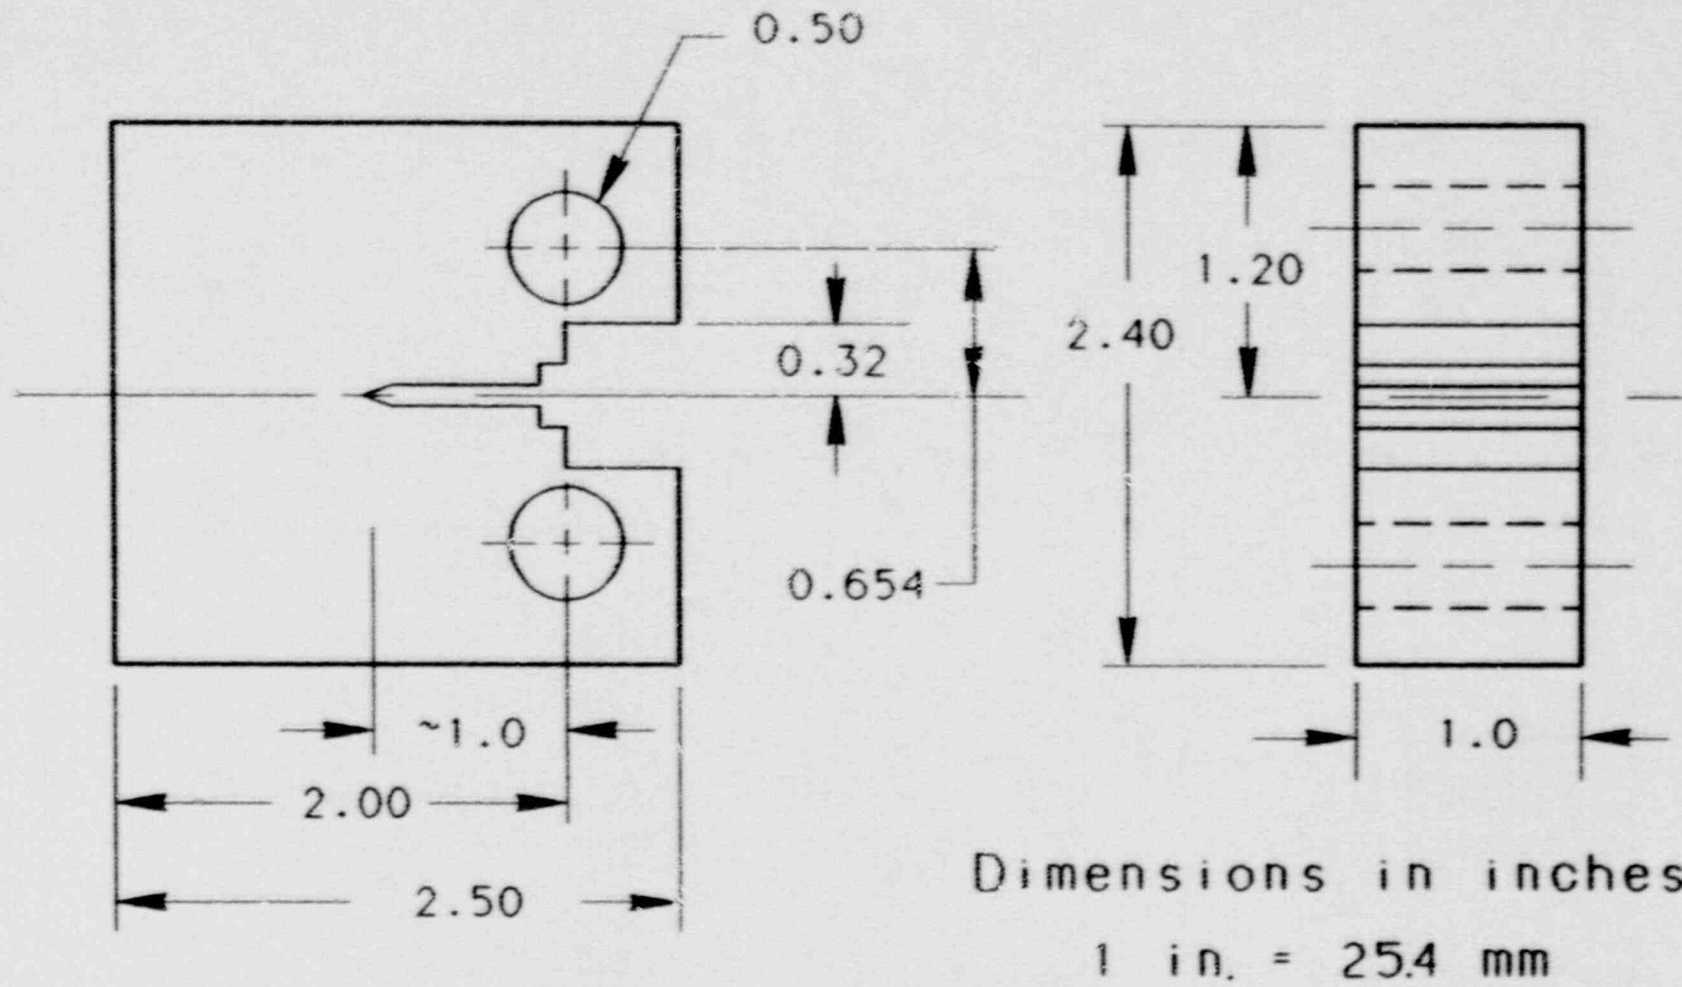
Fracture toughness tests of A 106 Gr. C used this IT-CT specimen design.
